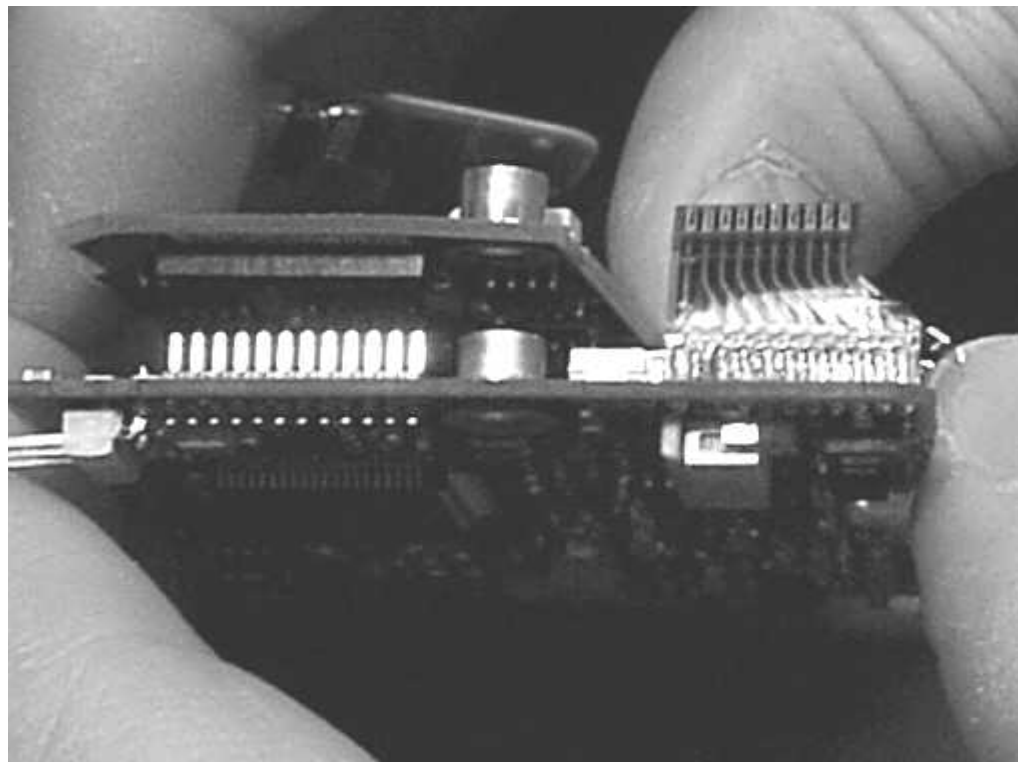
Pull the Main PCB and ECG PCB Apart
